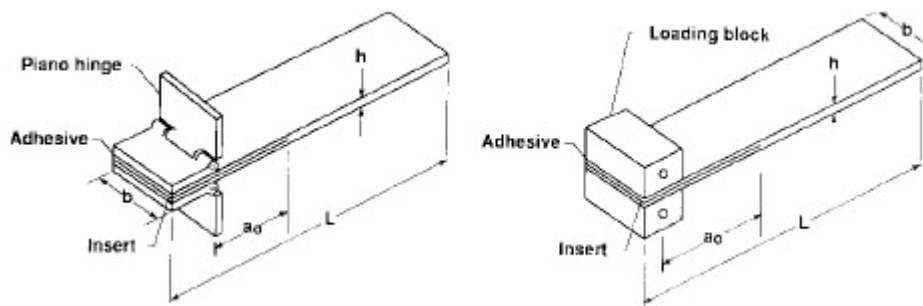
Double Cantilever Beam Specimen (a) with piano hinges, (b) with loading blocks. [52]
